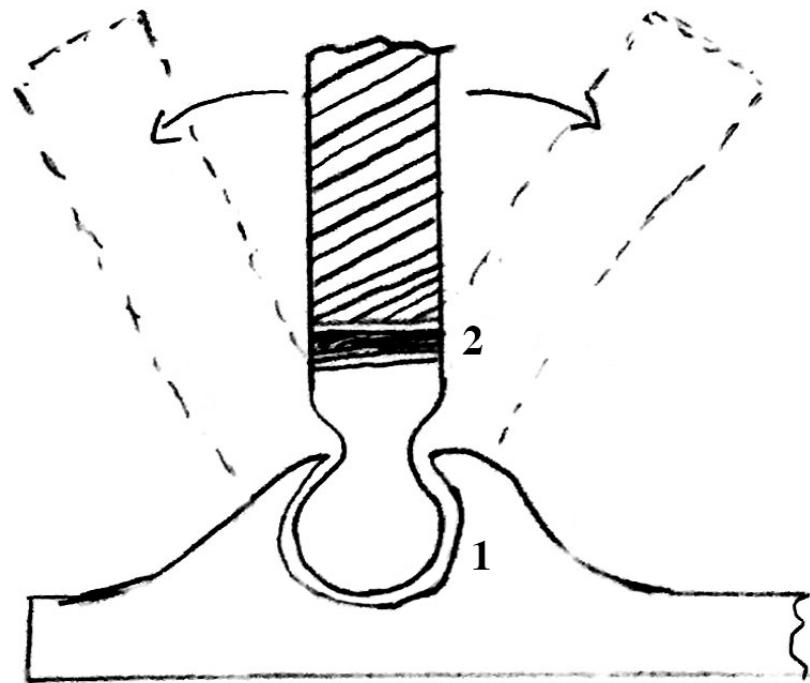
Detail view of the ball & socket interface connecting the lead screws and robot platform.
